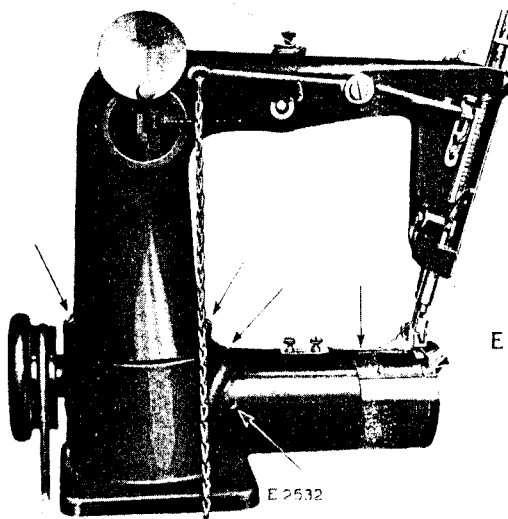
OILING POINTS AND ADJUSTMENTS AT THE BACK OF THE MACHINE
